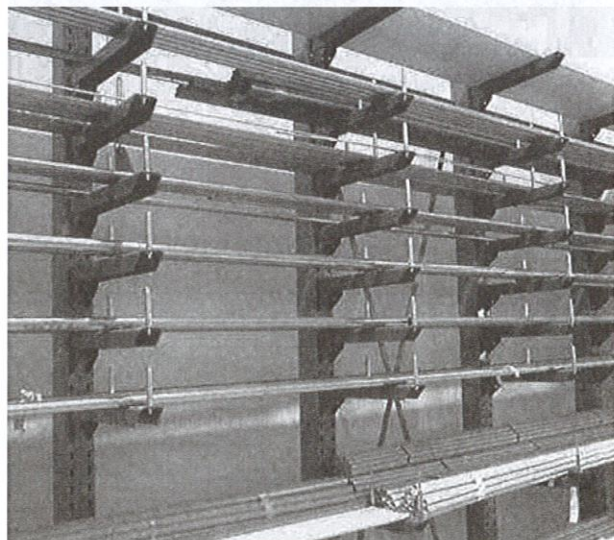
Cantilever racks for light loads with arms furnished with end stops
